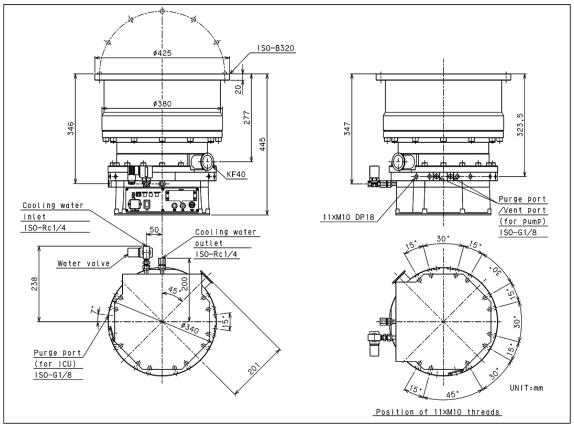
EMT3300MK-B ISO-B320 inlet flange type
